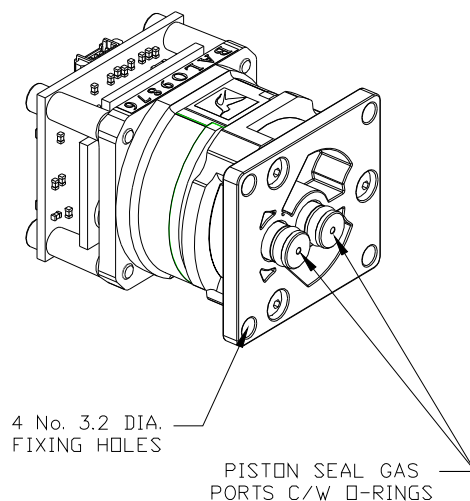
Flange mounted – gas connection via Servomex supplied gas ports
